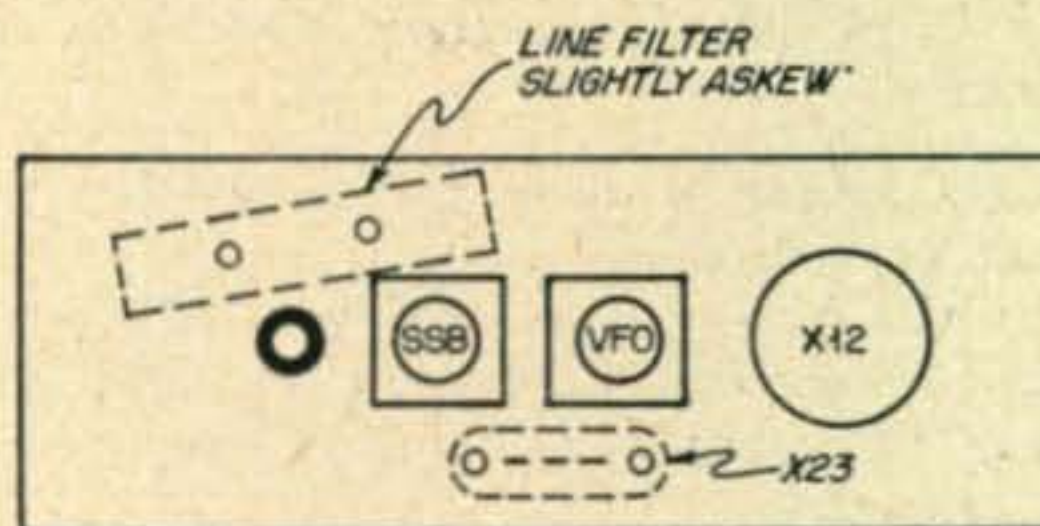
Mounting details inside the skirt of the extra co-ax socket input on the VIKING II.
